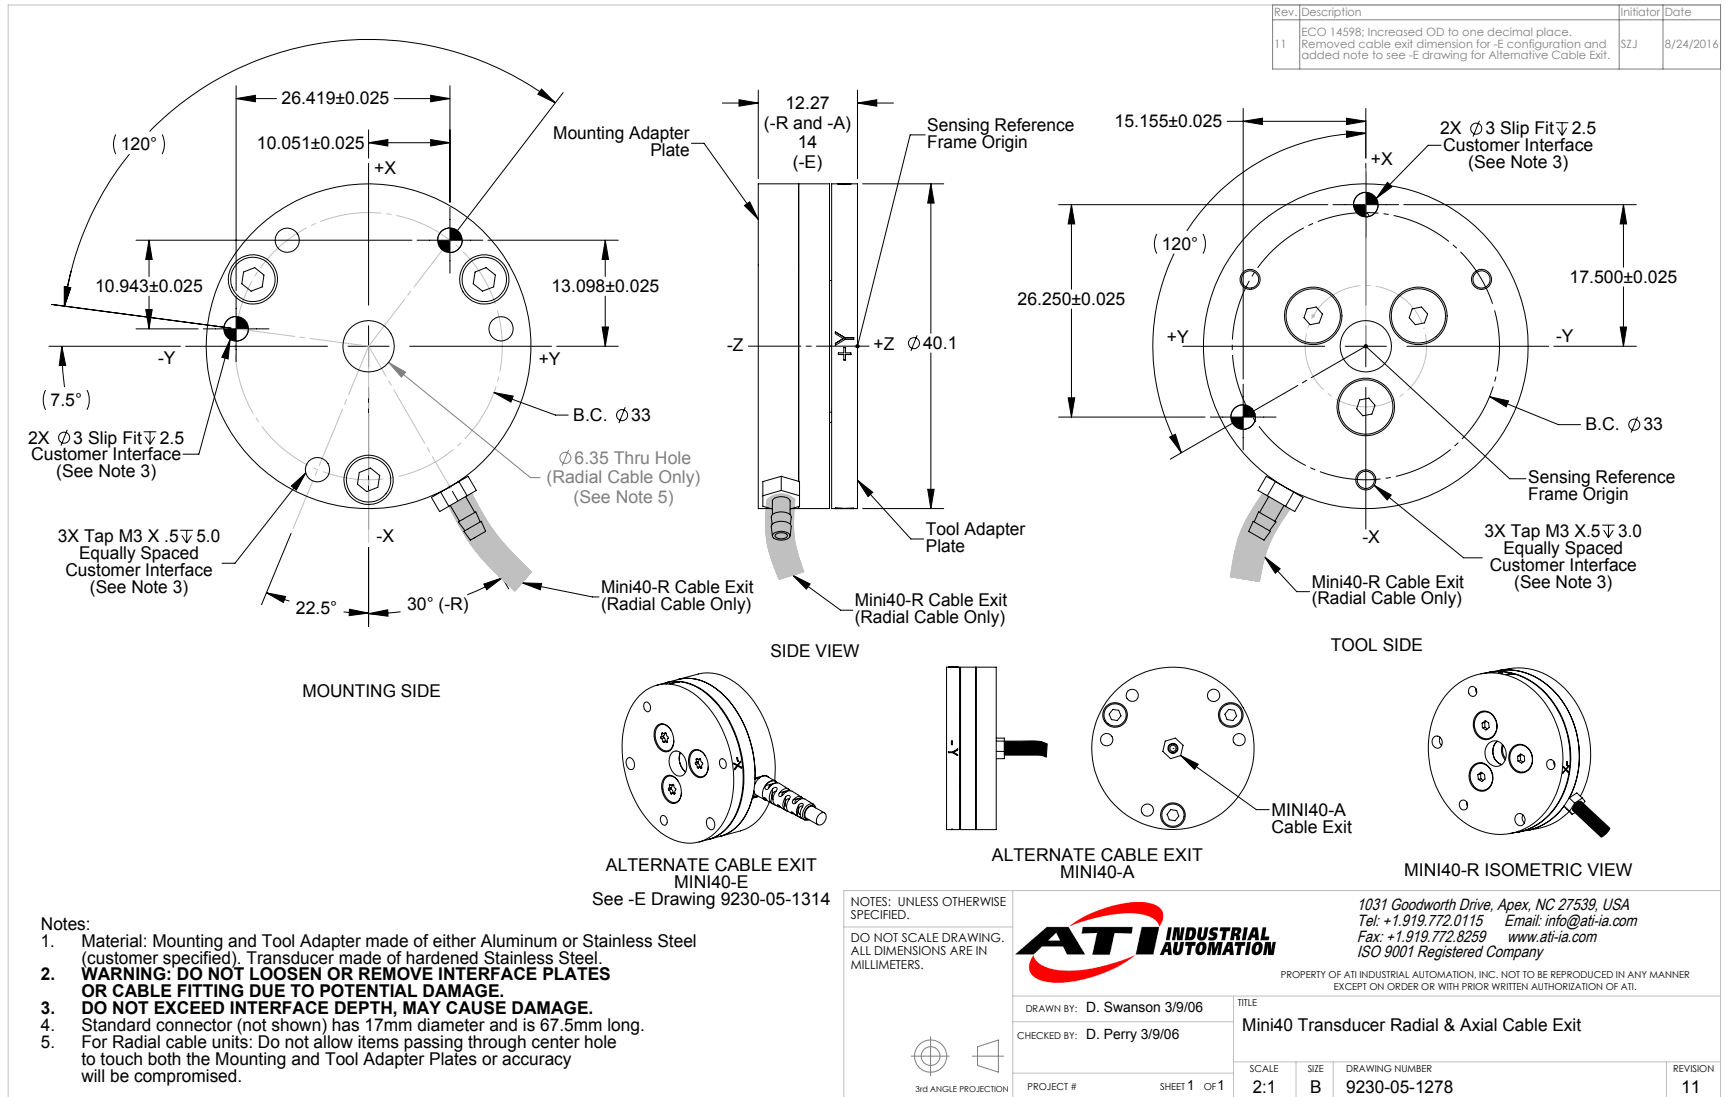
6-axis load cell, manufacturer part number 9105TWMMini40R.
